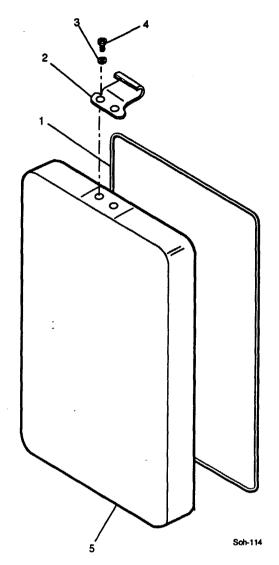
Disassembly of Control Panel Cover Assembly
